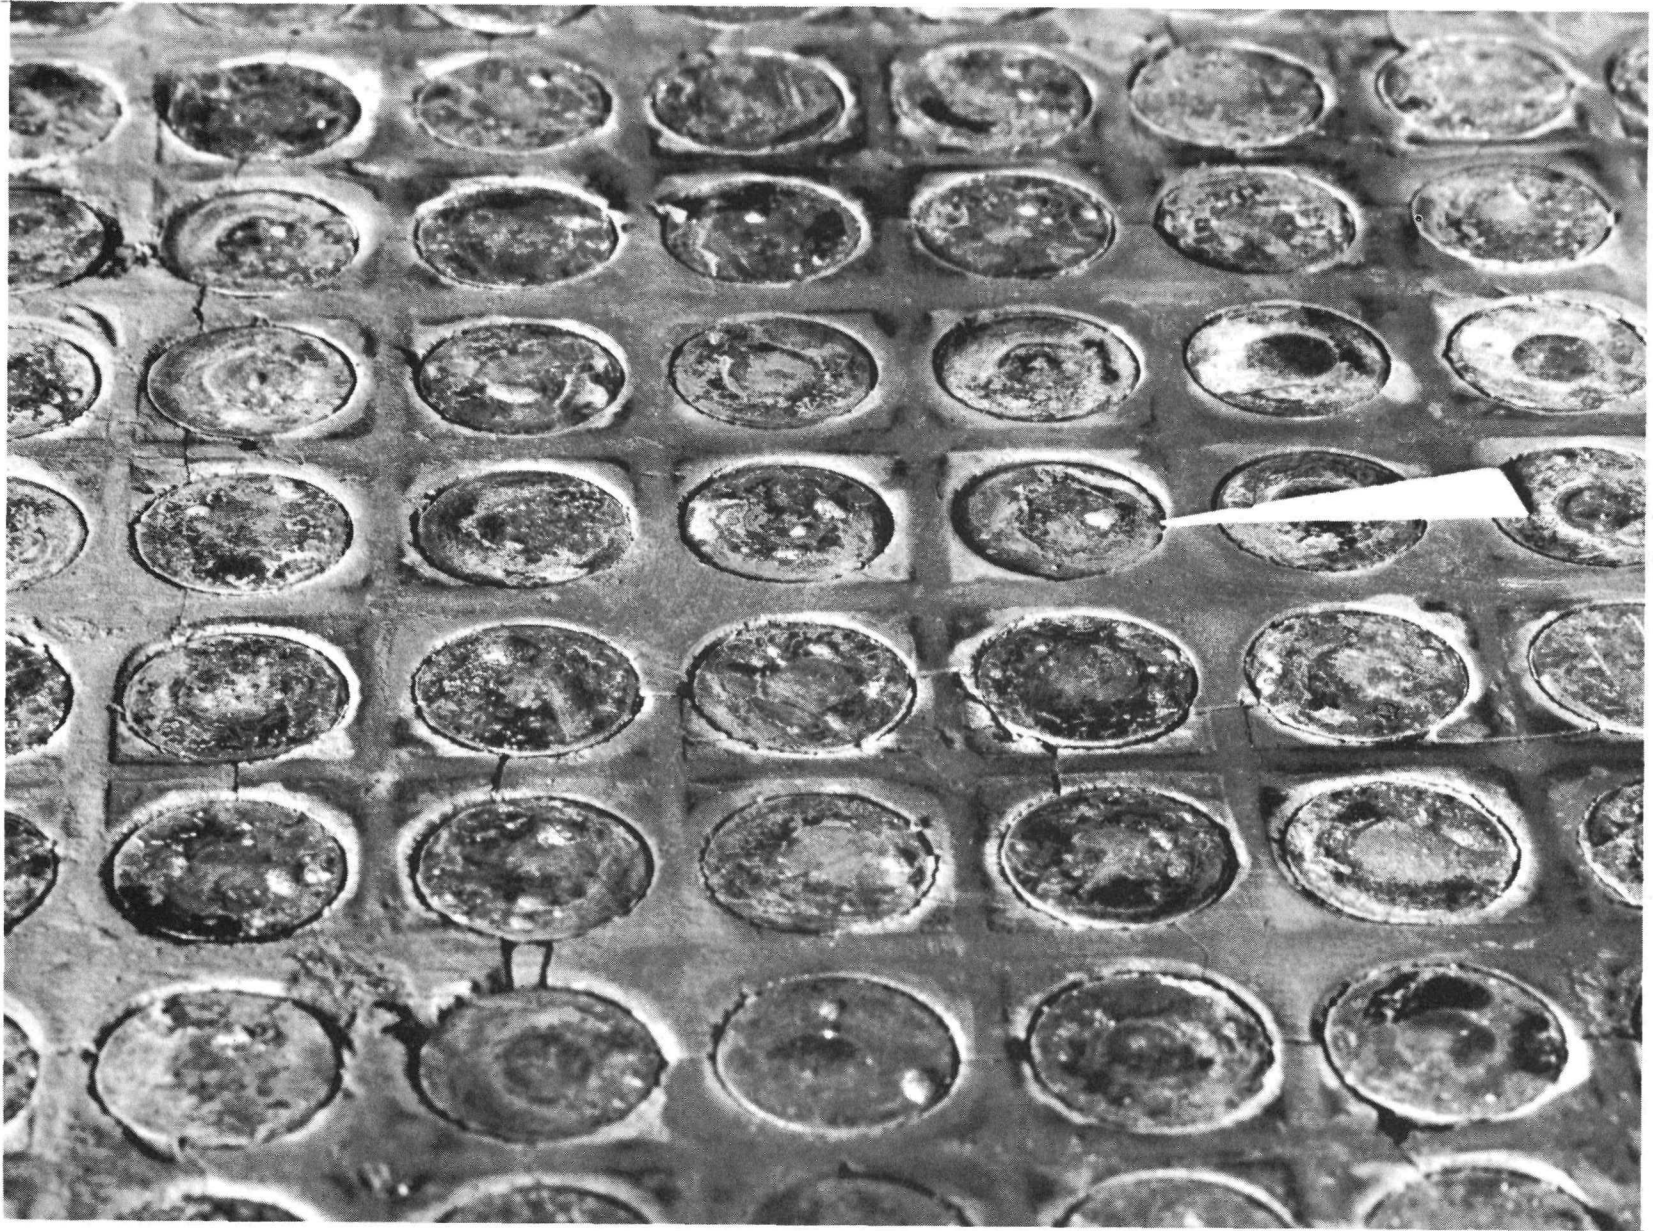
PISTON HEAT SINK MODULE T/E CONVERSION ASSEMBLY
